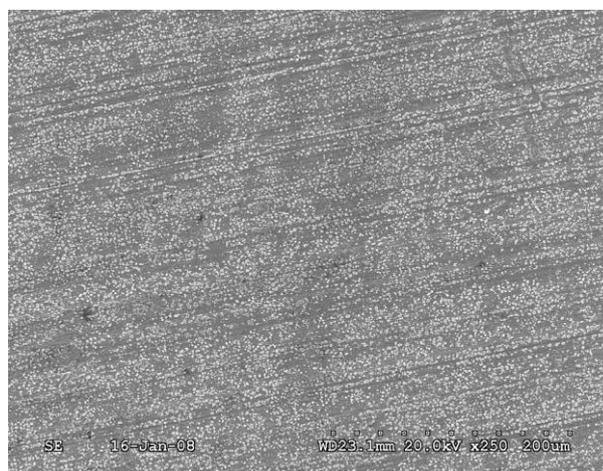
Image of inside working surface of the nozzle tip body. Visible lines of machining shaping the surface of mating with the nozzle needle. Oxide bands arranged in accordance with the machining lines draw attention
